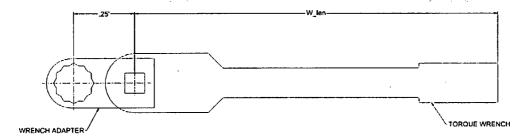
Wrench Adapter and Wrench Torque Arm Dimensions
